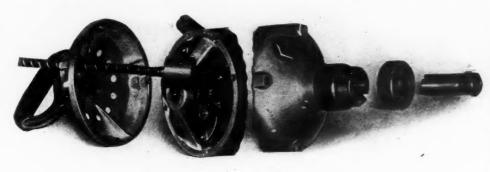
Details of the Commutator End of the Motor and of the Socket
